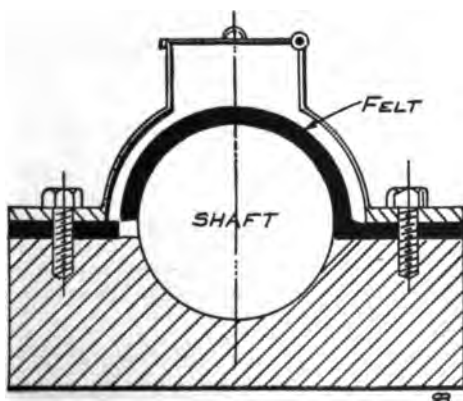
SEC. 7e.—Method of applying oil lubrication to a semi-enclosed bearing.
